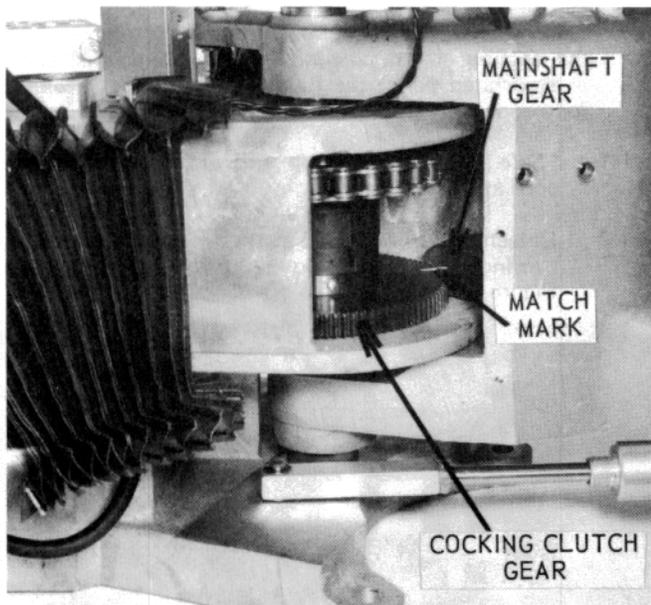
Correct Meshing of Cocking Clutch Gear and Mainshaft Gear
